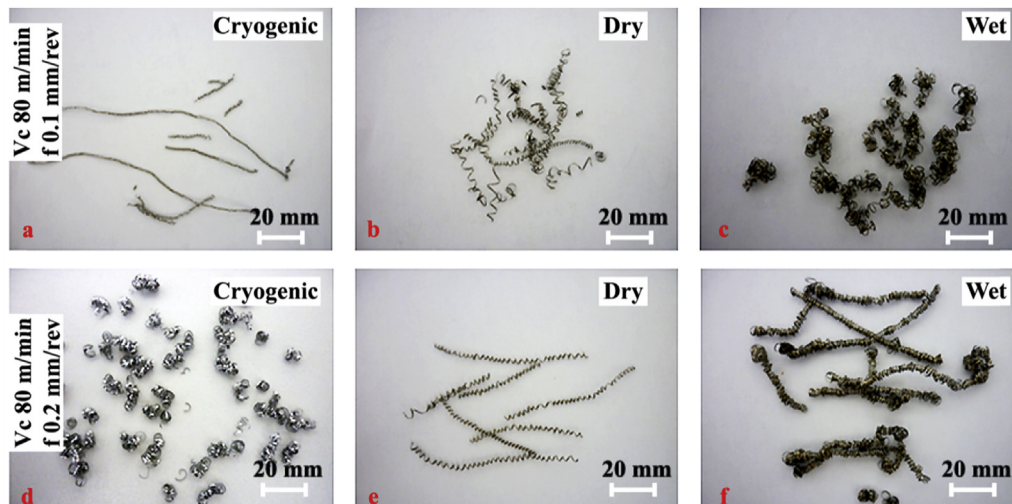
Chip morphology under cryogenic, dry and wet turning conditions after 8 min of cutting and for a cutting speed of 80 m/min.
